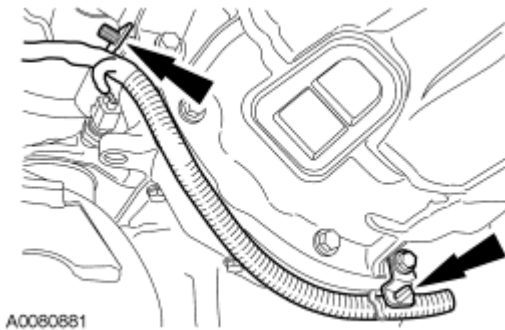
Locating Transmission Dust Shield Bolts
